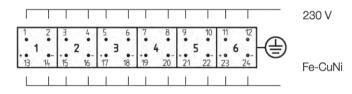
Terminal assignment as per DIN 15756 (HASCO standard)
